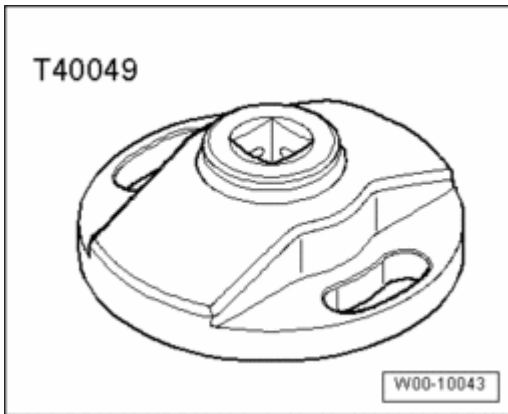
Identifying Special Tools - Camshaft Timing Chain, Removing And Installing
